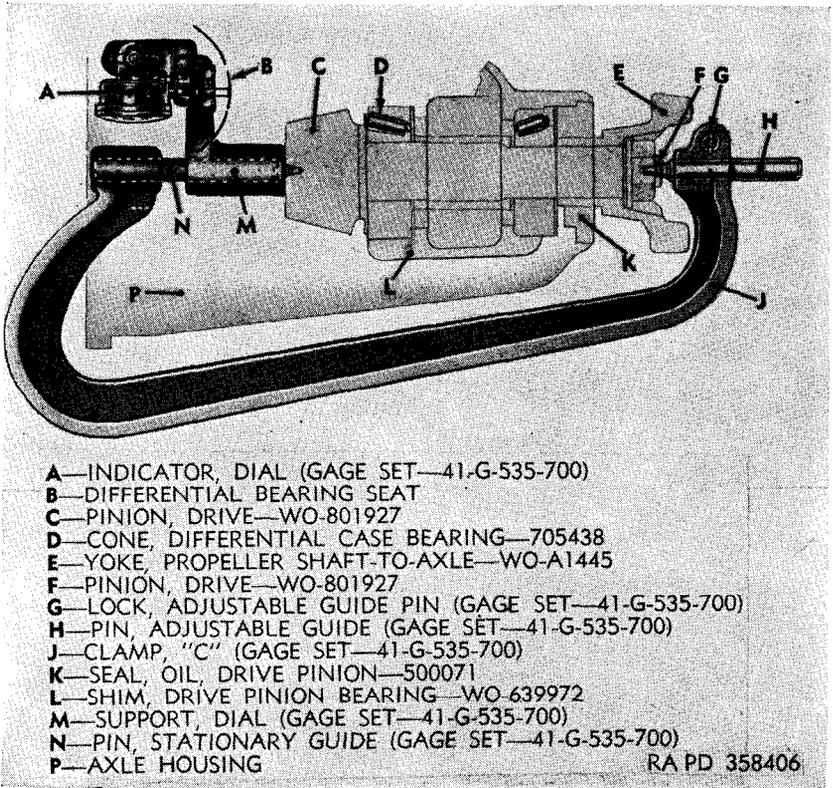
Seating drive pinion setting gage set 41-G-535-700.
